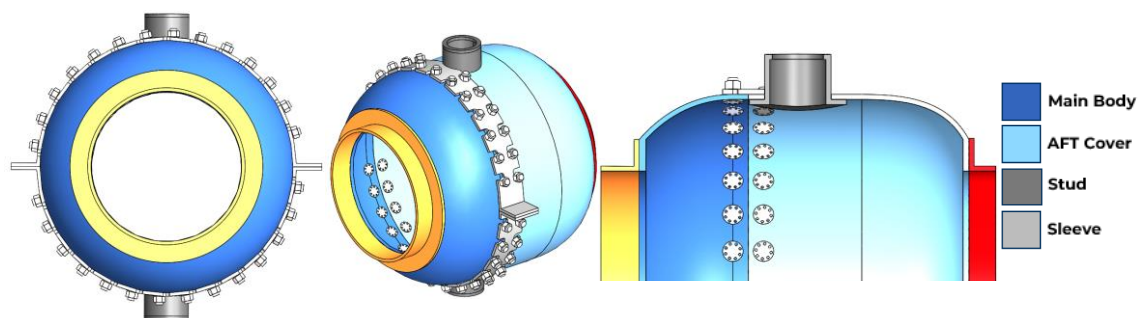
L-shaped slots in the sleeve connection for axial loads compensation
